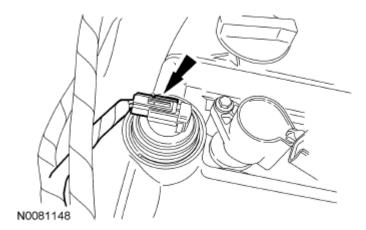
Locating Variable Camshaft Timing Electrical Connector Courtesy of FORD MOTOR CO.
